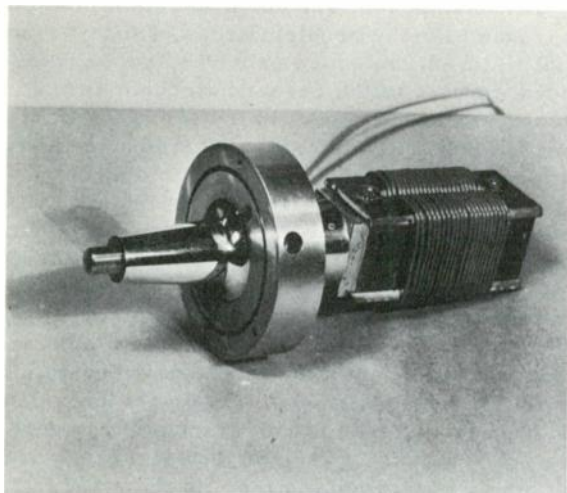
Typical ultrasonic transducer. Housing, toolholder and cutting tool assembly—not shown. Power input end to toolholder at threaded section. Mechanical motion parallel to long axis - mounting in housing at large ring section.
